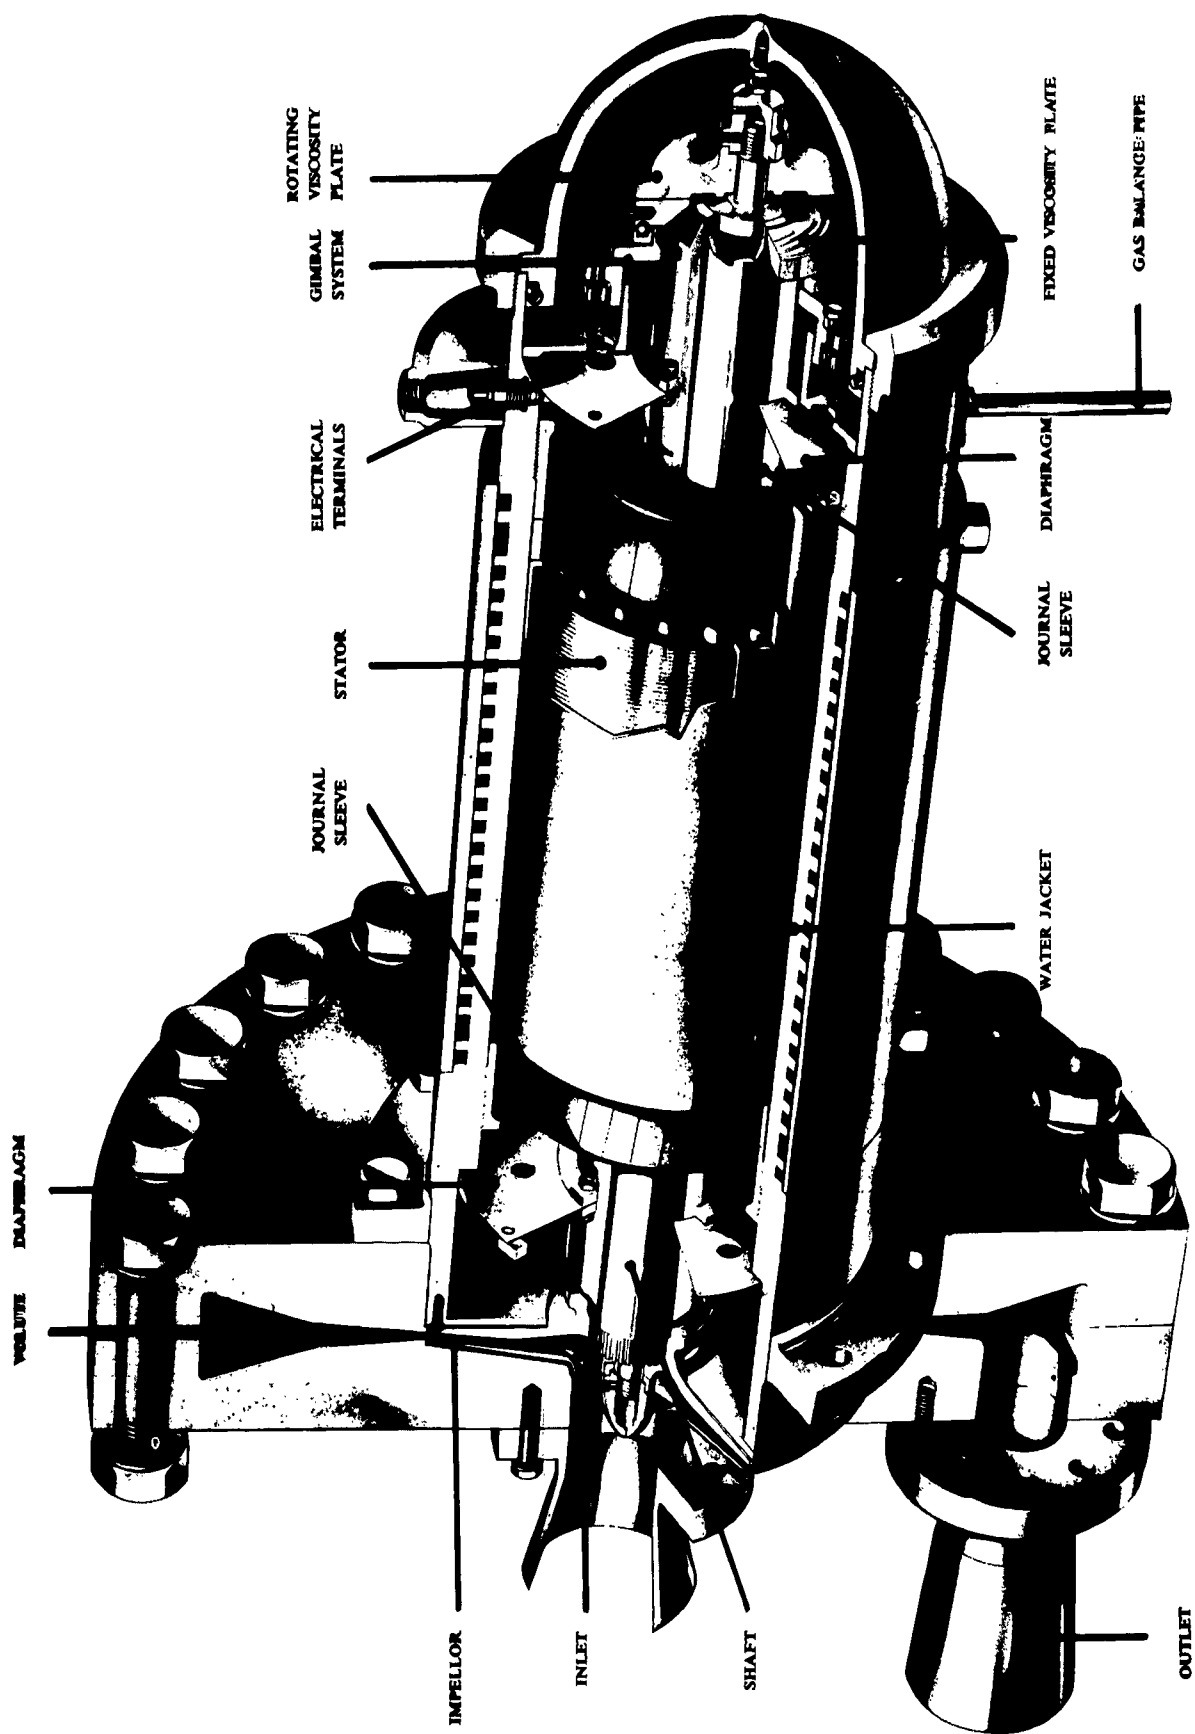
Centrifugal, Bristol-Siddeley Built Gas-Bearing Supported Compressor
